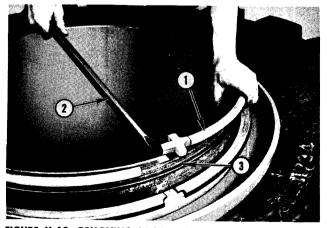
REMOVING LOCK RING 1. Lock Ring 2. Tire Tool 3. "O" Ring
